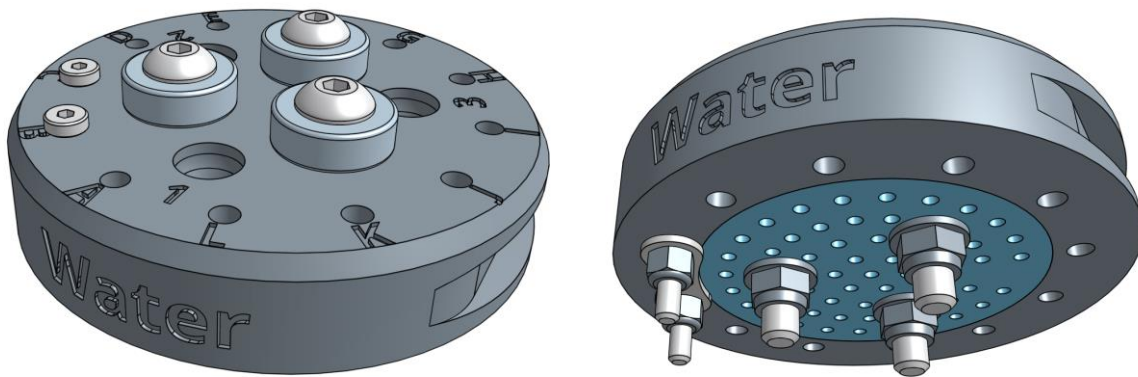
Original watering tool head, top and bottom respectively. The blue piece in the middle of the bottom is a separate piece that is press fit and bolted onto the main tool assembly and contains the holes for the water to come out of.
